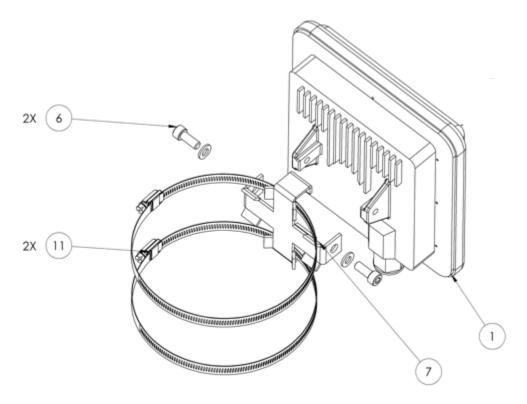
Exploded View of the RSU with Mounting Bracket and Strap
